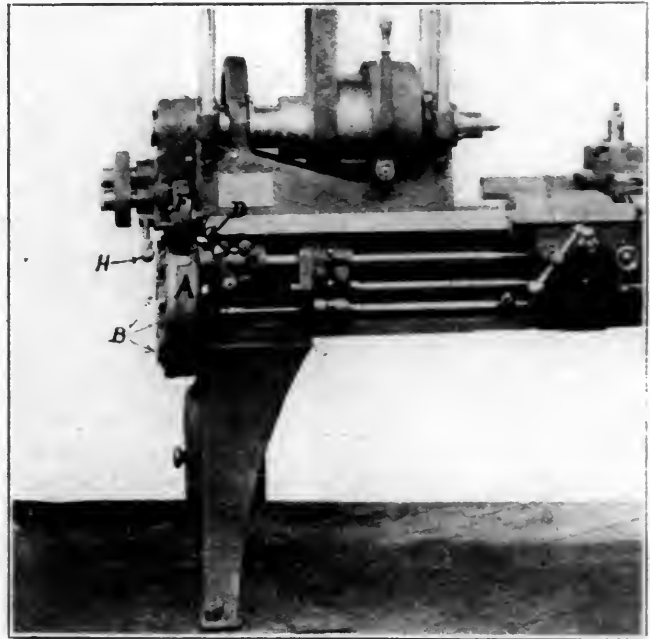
IDEAL LATHE, SPRINGFIELD MACHINE TOOL COMPANY, SHOWING CHANGE-GEAR BOX.
